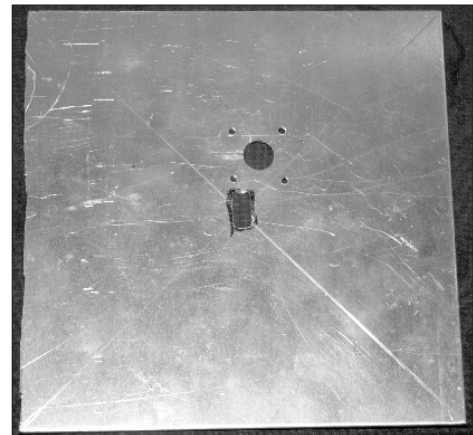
Back plate with fiberglass support rod hole and holes for type N connector.
